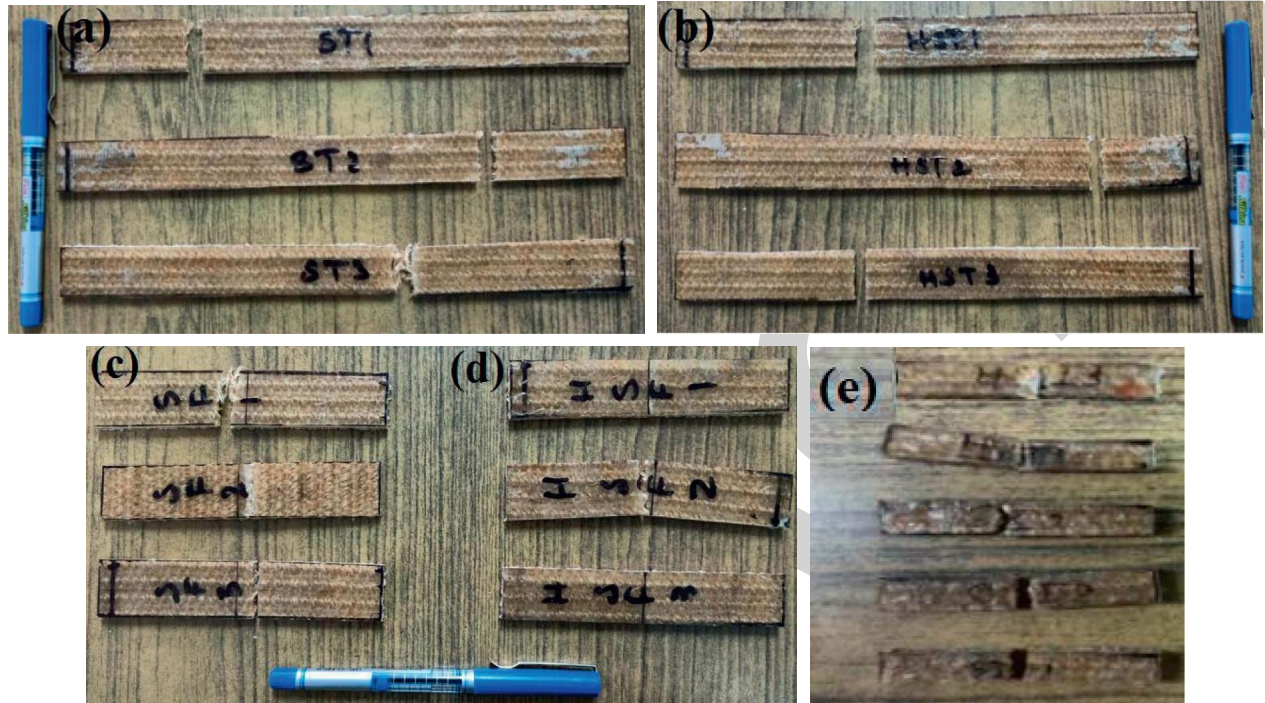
Sisal fabric-reinforced composites. (a) Untreated-fractured tensile specimens. (b) Heat-treated-fractured tensile specimens. (c) Untreated-fractured flexure specimens. (d) Heat-treated-fractured specimens undergo flexural failure. (e) Impact test fractured specimens.
